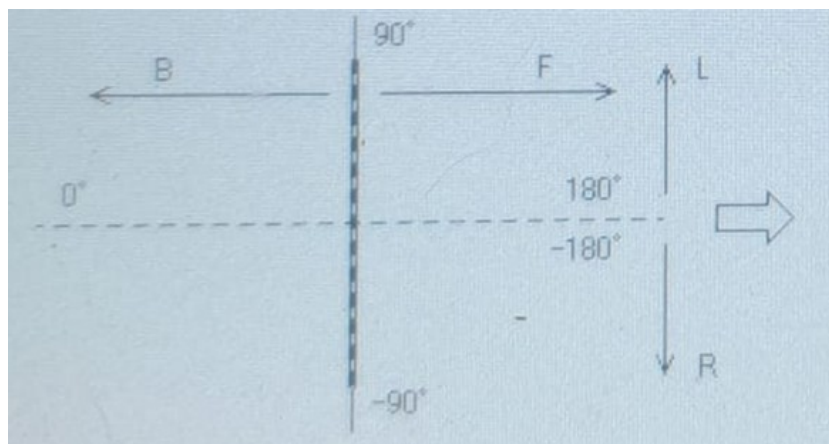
Side-to-side weaving pattern, perpendicular to the welding direction
